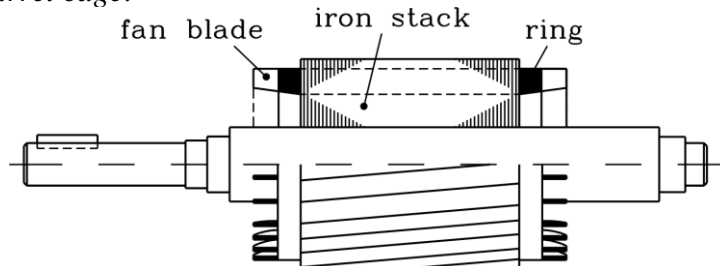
Die-cast aluminium cage rotor with skewed rotor bars and small fan blades at the rings
